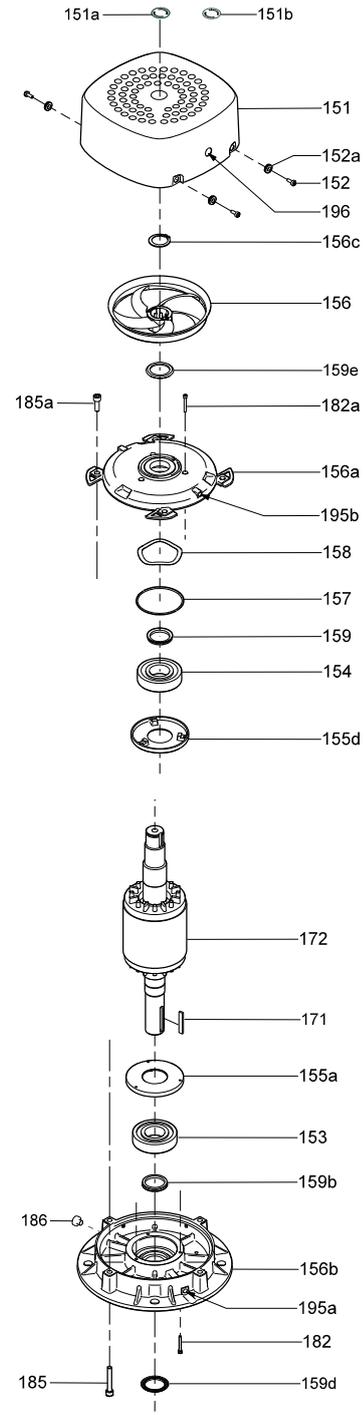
Detail from fig. 29, exploded view of the MGE-F
